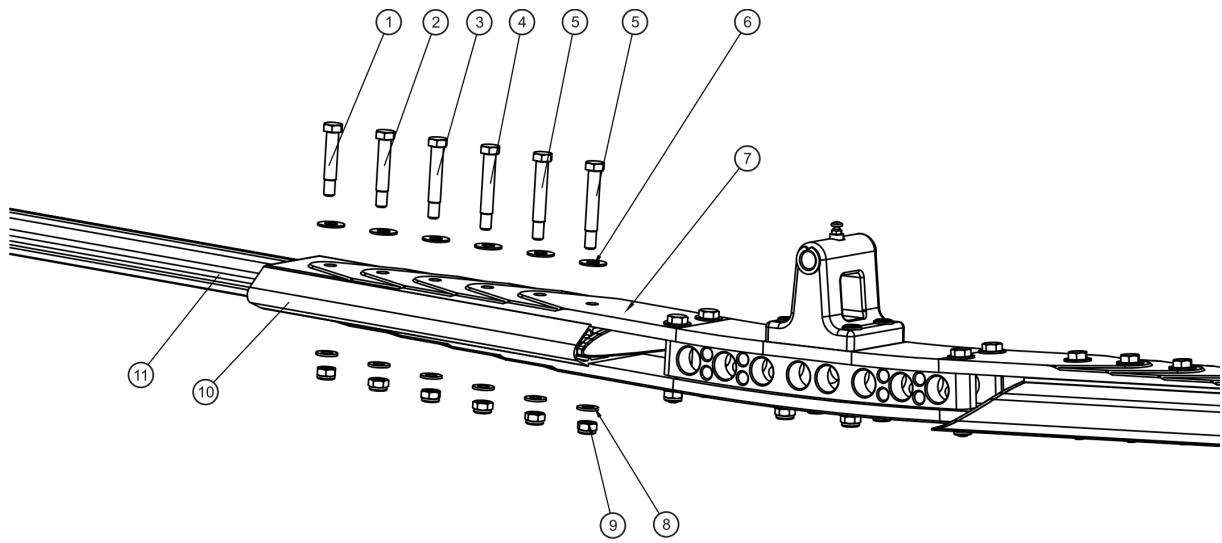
Assembly rotor - teetering parts (Effectivity: RS II)
